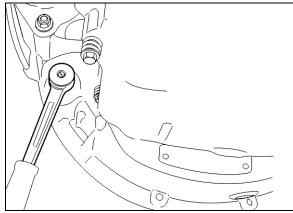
VOLVO ENGINE CRANKING POSITION
